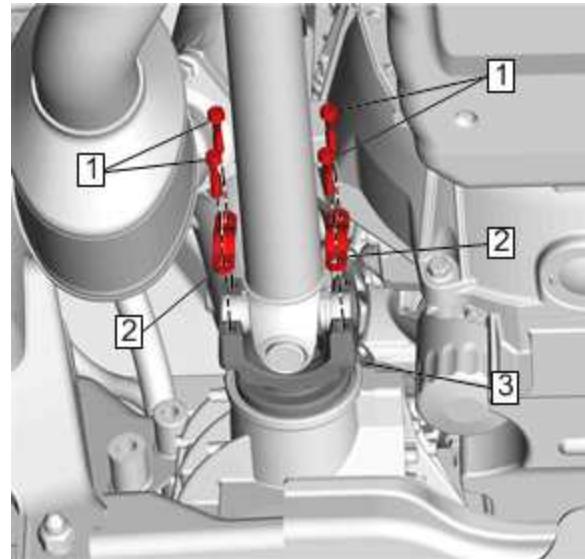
Front Axle Pinion Yoke Bolts And Retainers
